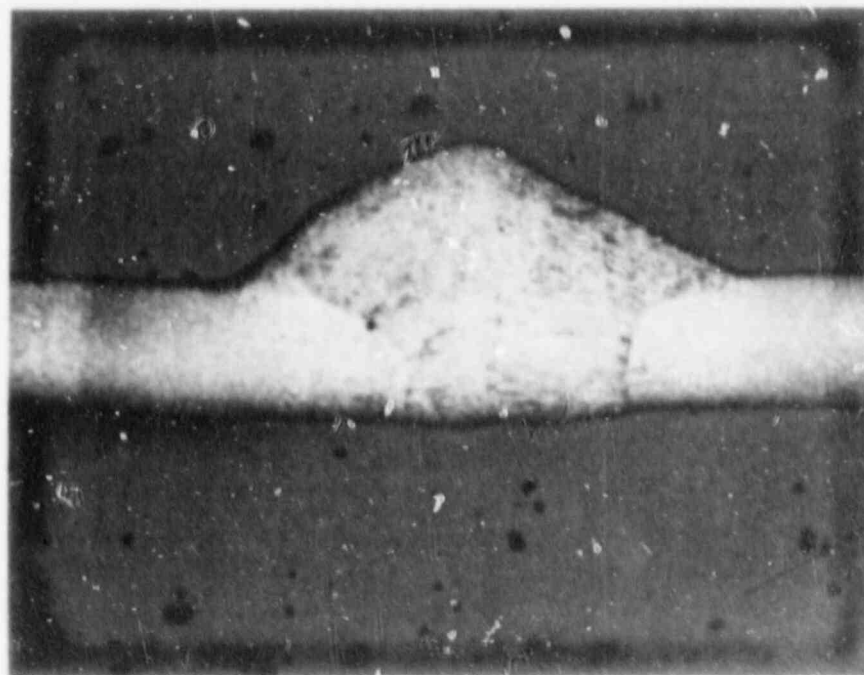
Cross-section of weld between cylinder sections (horizontal position 10x)
